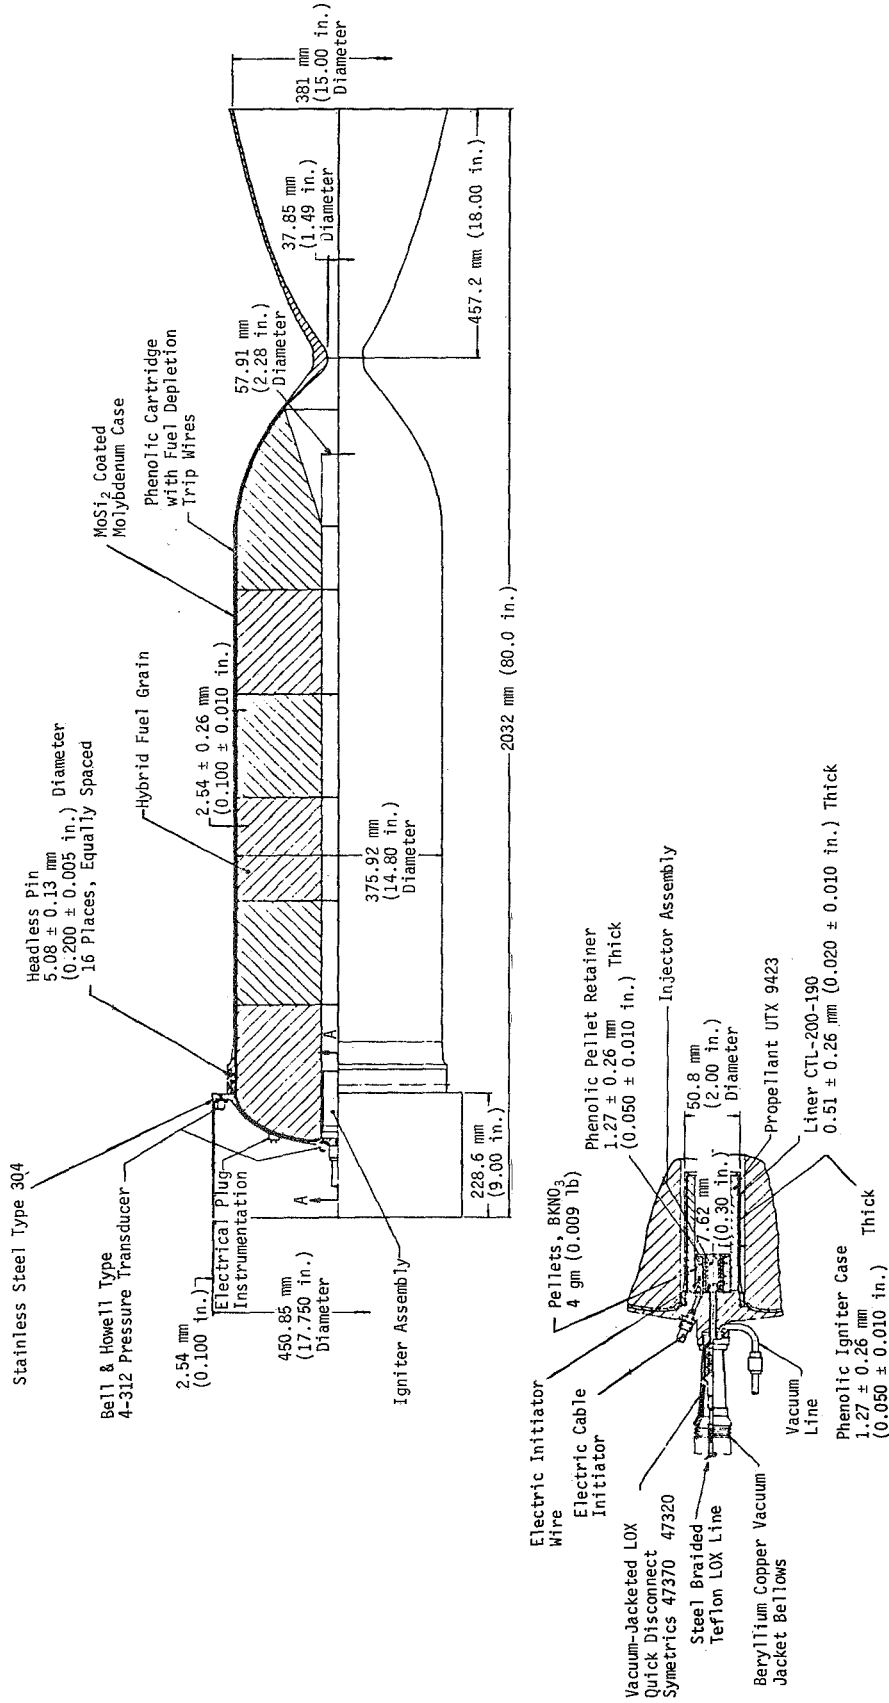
Spin/Despin Thrust Chamber Assembly
